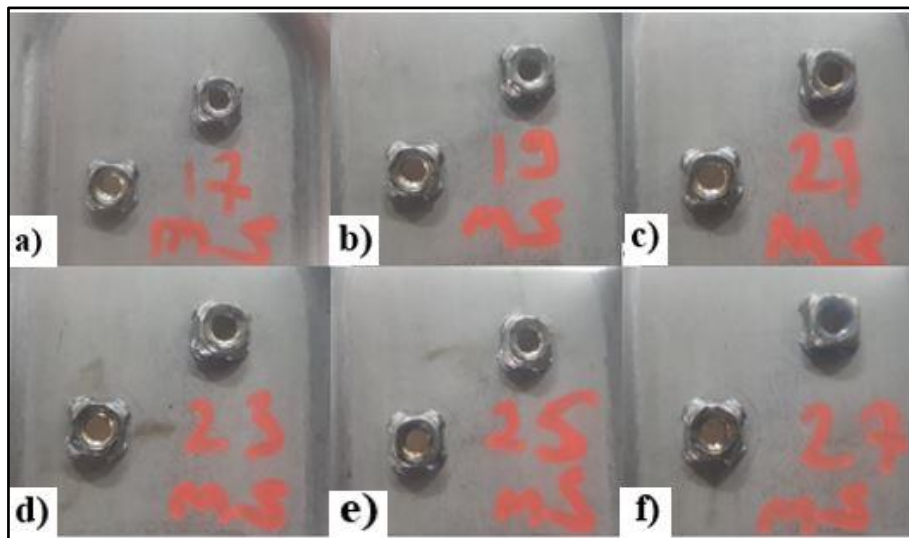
Images of test specimens after projection welding operation carried out at different weld time: a) 17 ms, b) 19 ms, c) 21 ms, d) 23 ms, e) 25 ms and f) 27 ms
